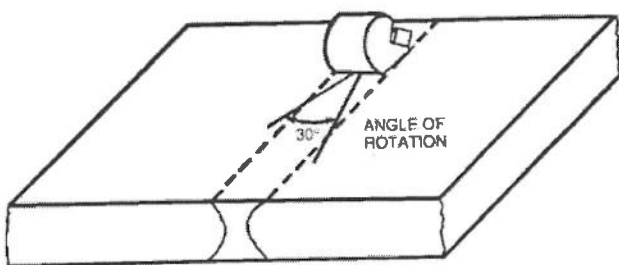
Supplementary Technique 2, for Inspecting Butt Welds for Suspected Cross-Cracking when the Weld Bead is Ground Flush
